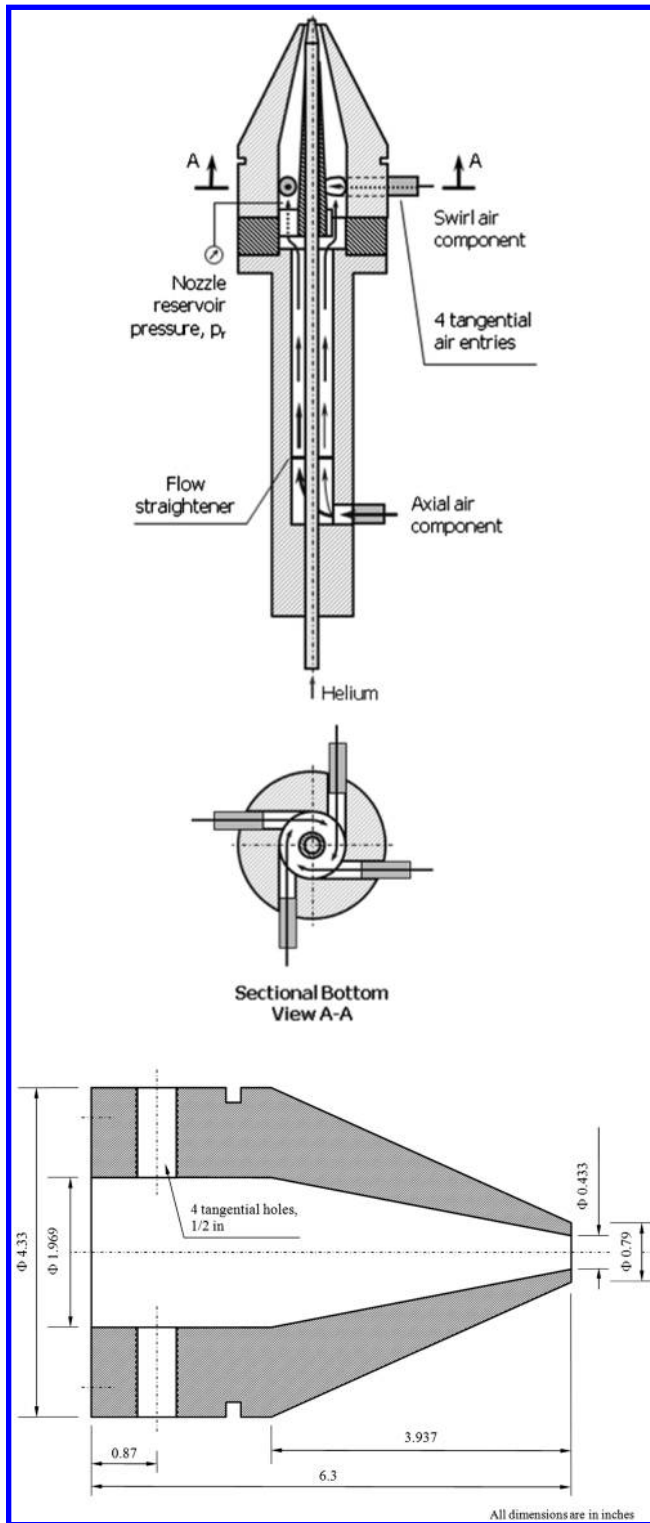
Schematic of the supersonic-nozzle assembly at the University of Maryland.
